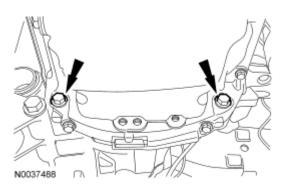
Locating Bellhousing-To-Oil Pan Bolt Courtesy of FORD MOTOR CO.
